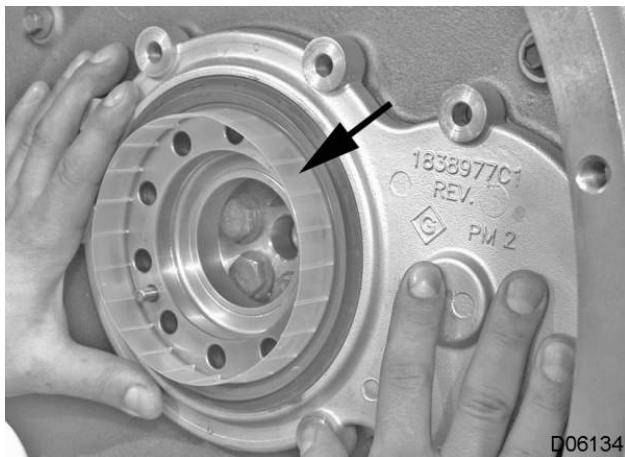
Press Rear Oil Seal Retainer and Seal Over Secondary Flange Gear
